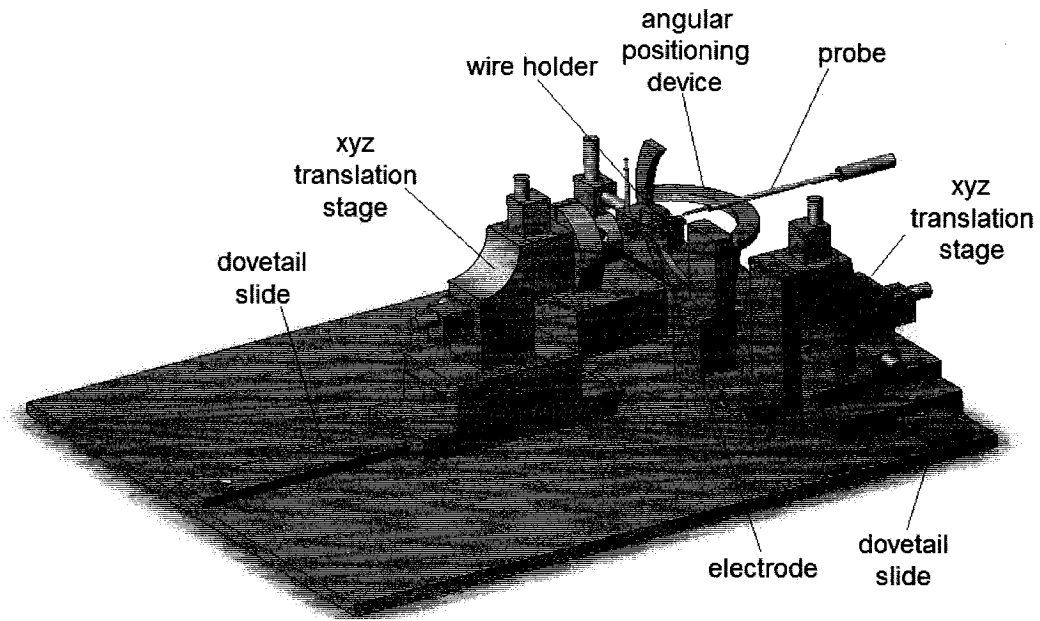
Sketch of hot-wire probe welding apparatus.
